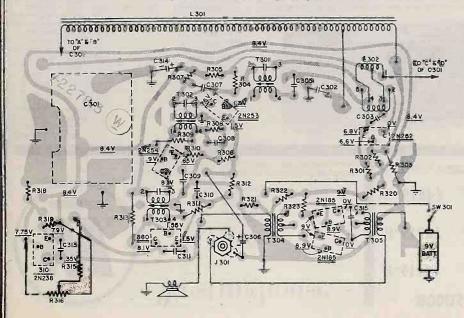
BOTTOM VIEW OF PRINTED BOARD SHOWING TOP COMPONENTS SYMBOLICALLY
